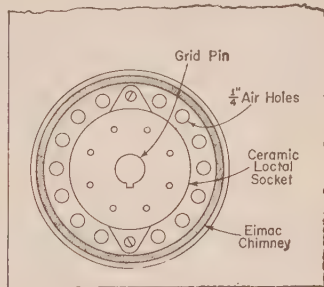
Cheap and easy socket and air system for the 4X150A tubes. The ceramic loctal socket is mounted in a conventional manner on the chassis while the holes and Eimac SK-606 chimney direct air from a blower below chassis.
